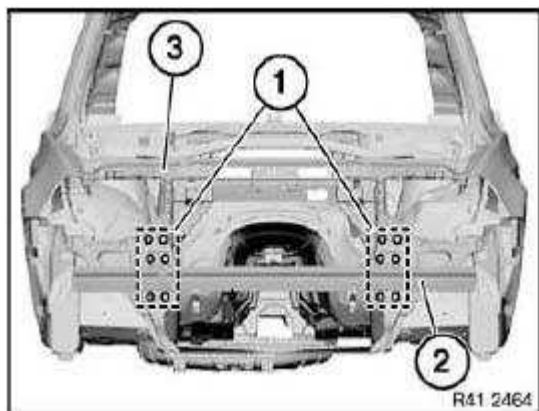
Screws, Bumper Trim Carrier And Front Panel
